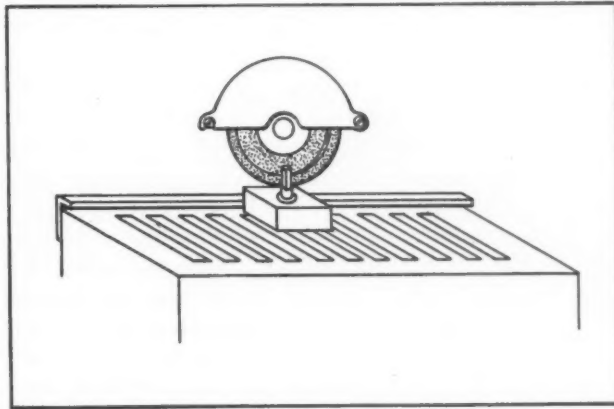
Simple Indexing Block Set-up for Grinding Square End on Short Length of Round Piece
